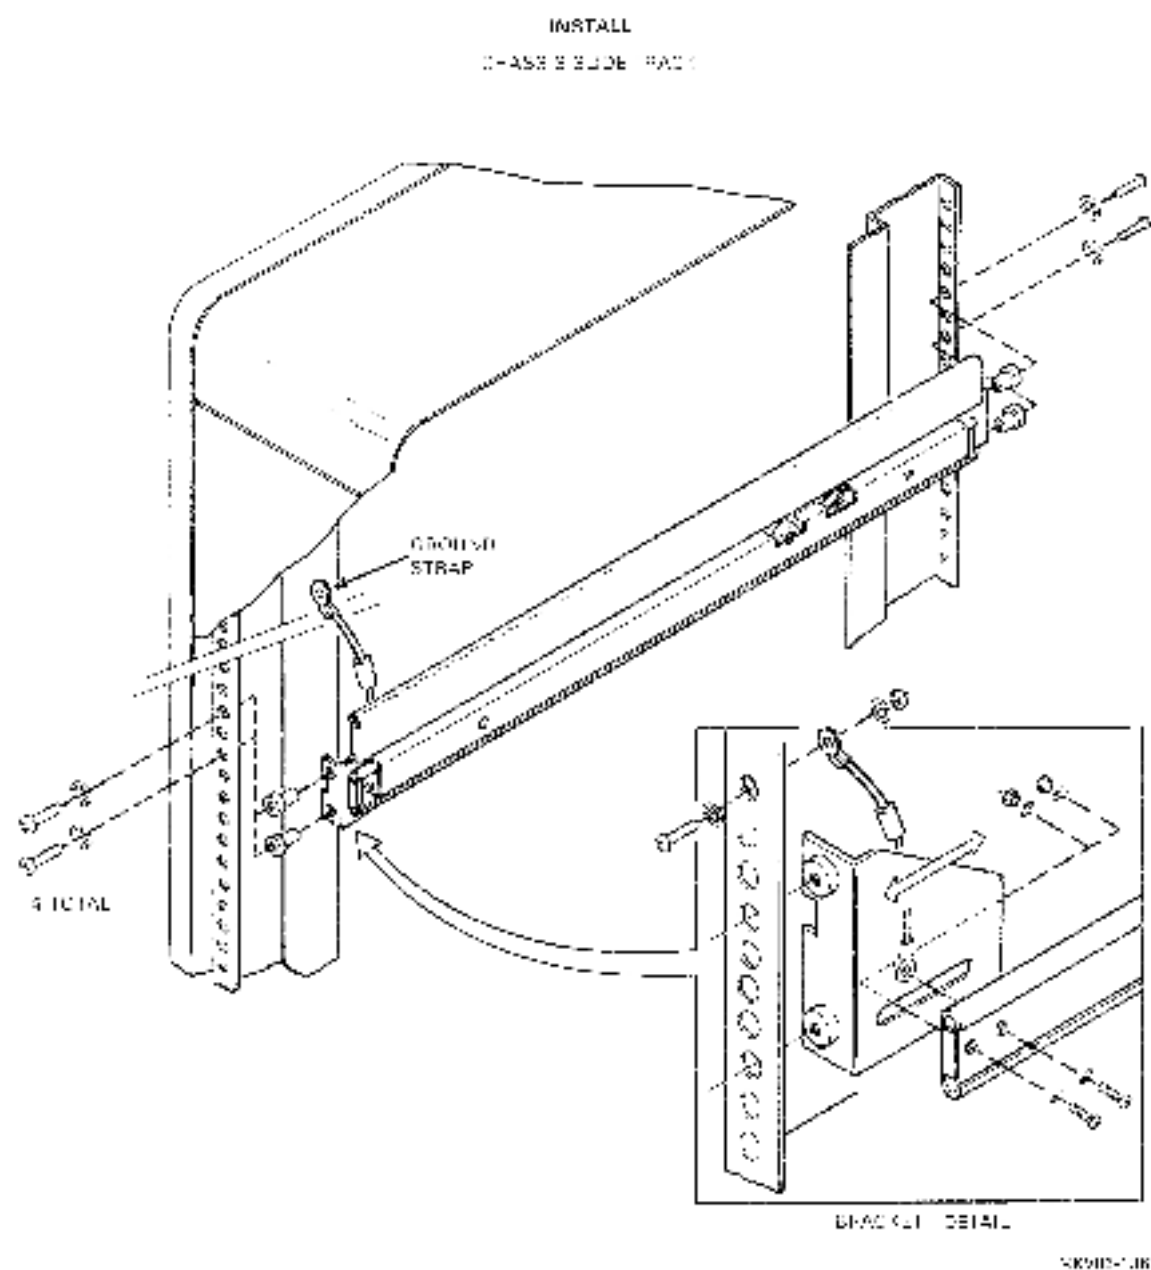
Mounting Box Installation Within an IT9652 Cabinet (Sheet 2 of 3)
